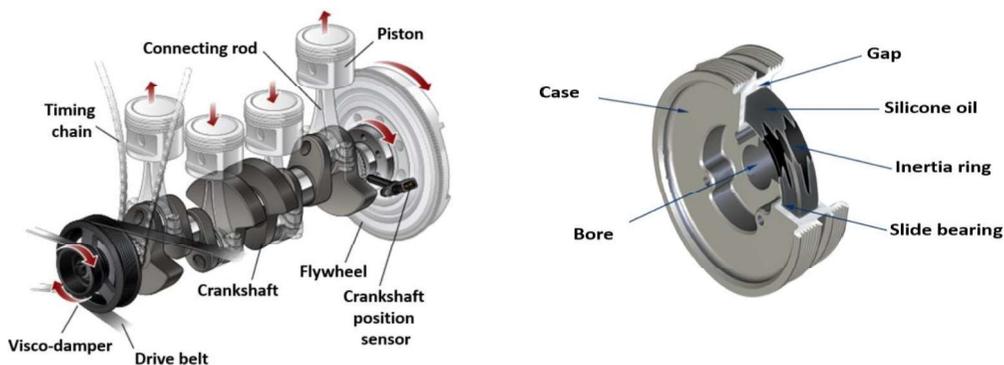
Crankshaft configuration (left) and structure of a visco-damper (right) [8]
